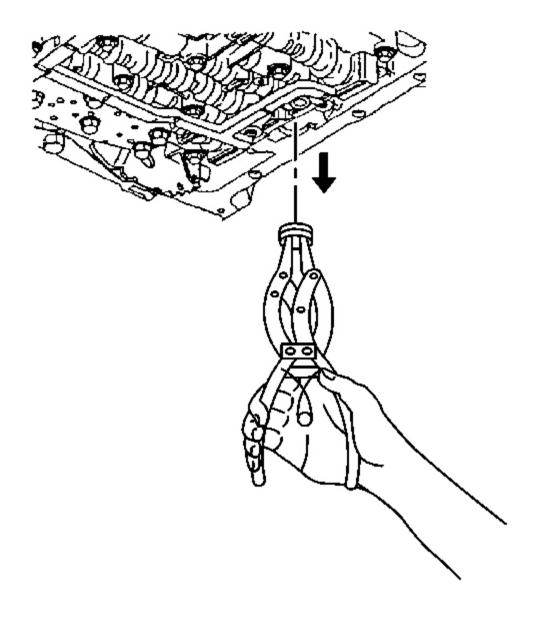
Removing The Filter Seal Courtesy of GENERAL MOTORS CORP.
